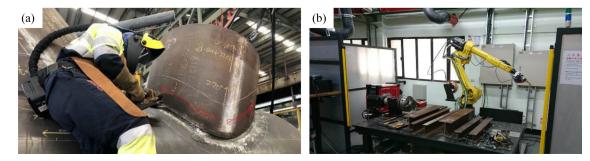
(a) Welding was manually performed in the shop, and (b) welding was done by a robot in the laboratory.
